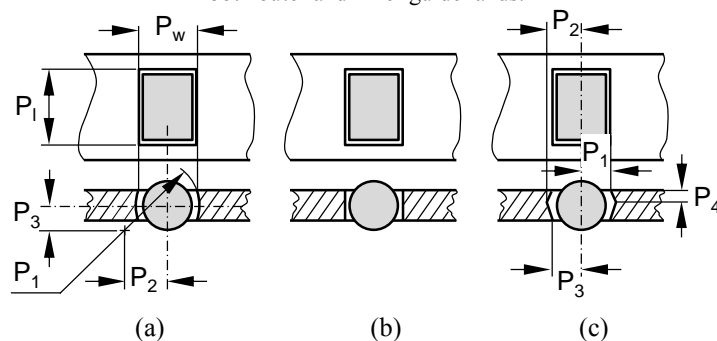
Cage pockets types: (a) Cylindrical; (b) Rectangular; (c) Guided surfaces.
